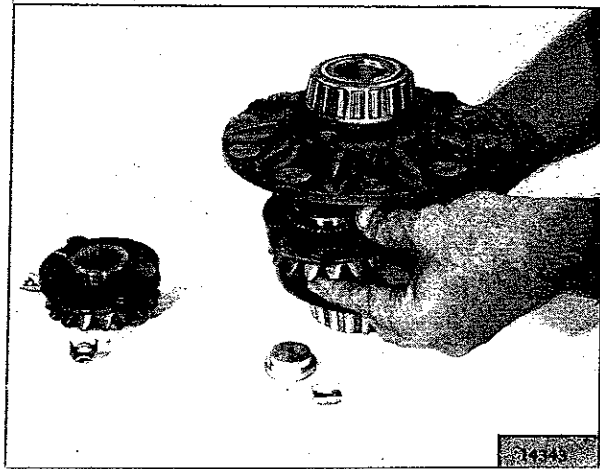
TRAC-LOK UNIT DISASSEMBLY
